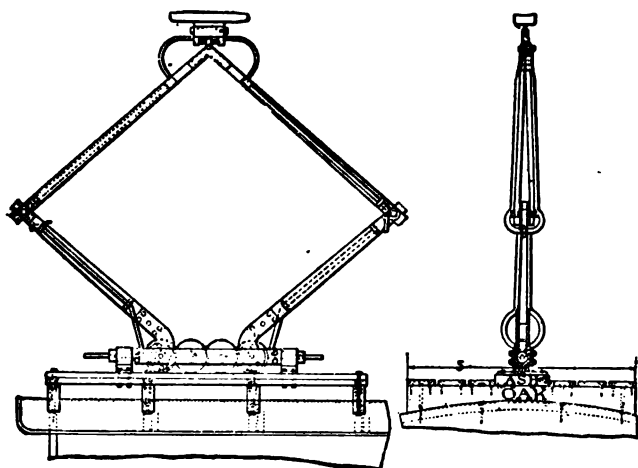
SIDE AND END VIEW OF TROLLEY.
